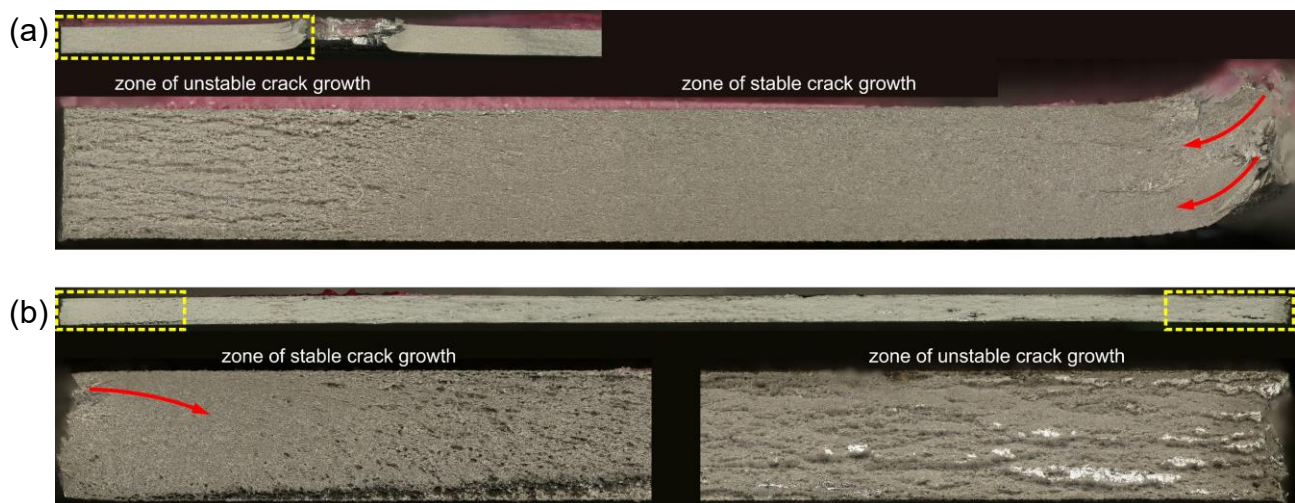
Typical fracture surfaces with fracture initiation (a) at the rivet hole and (b) at the side edge of the AZ91 sheet; the red arrows mark the positions of crack initiation
